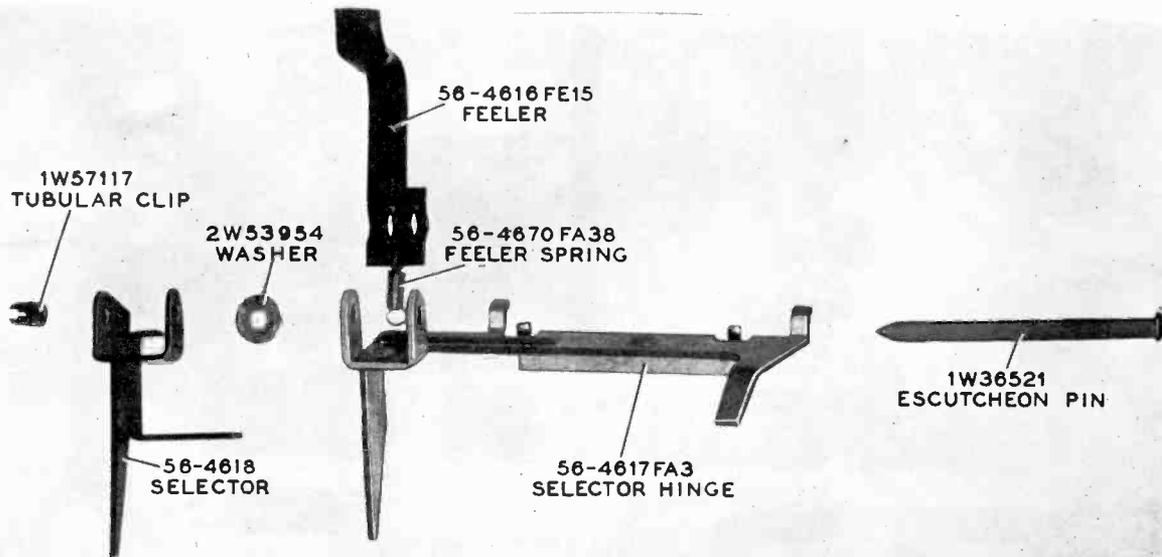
SELECTOR AND SELECTOR-HINGE ASSEMBLY
